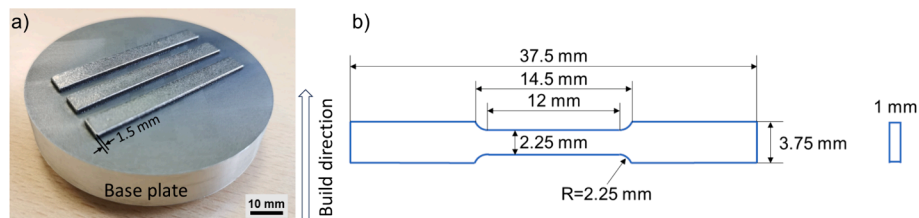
A) austenitic steel samples printed by maps and b) illustration of the dimension of the samples used for the tensile tests.
